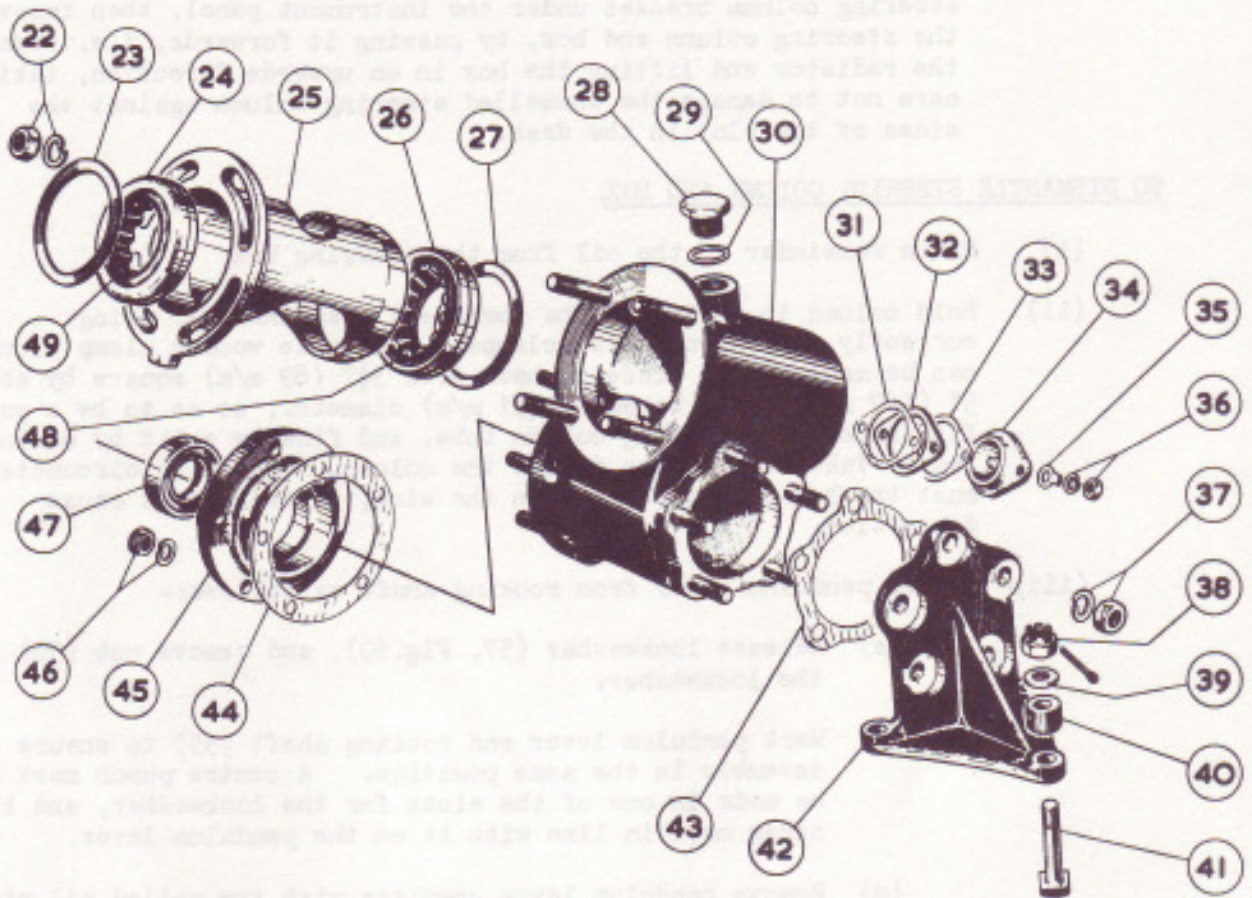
"EXPLODED" VIEW OF STEERING BOX.
